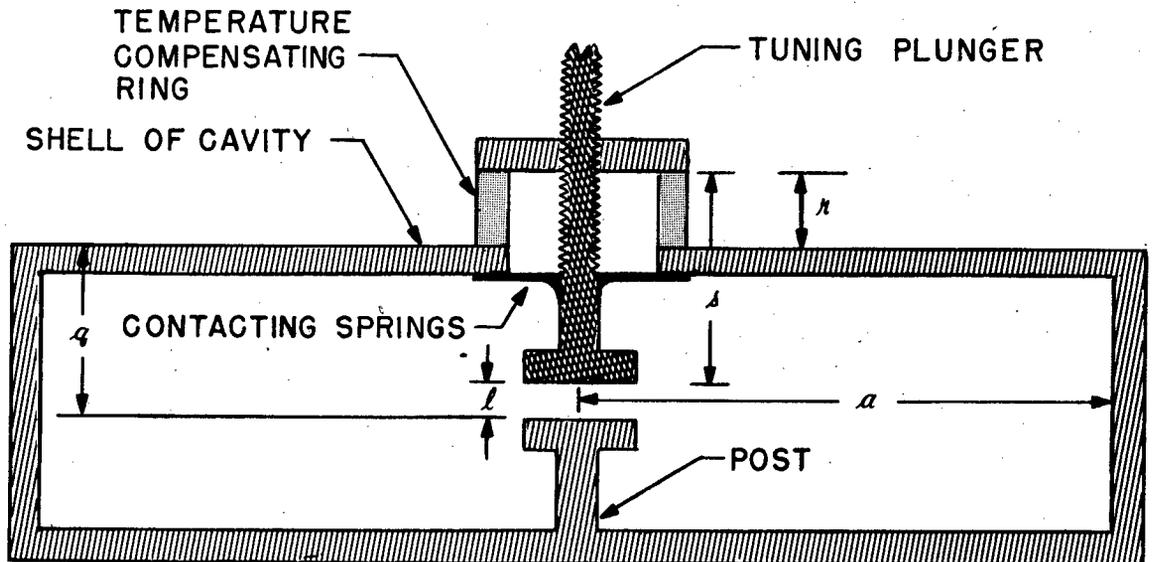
Geometric configuration of cavity (cross-section view with critical dimensions noted)
